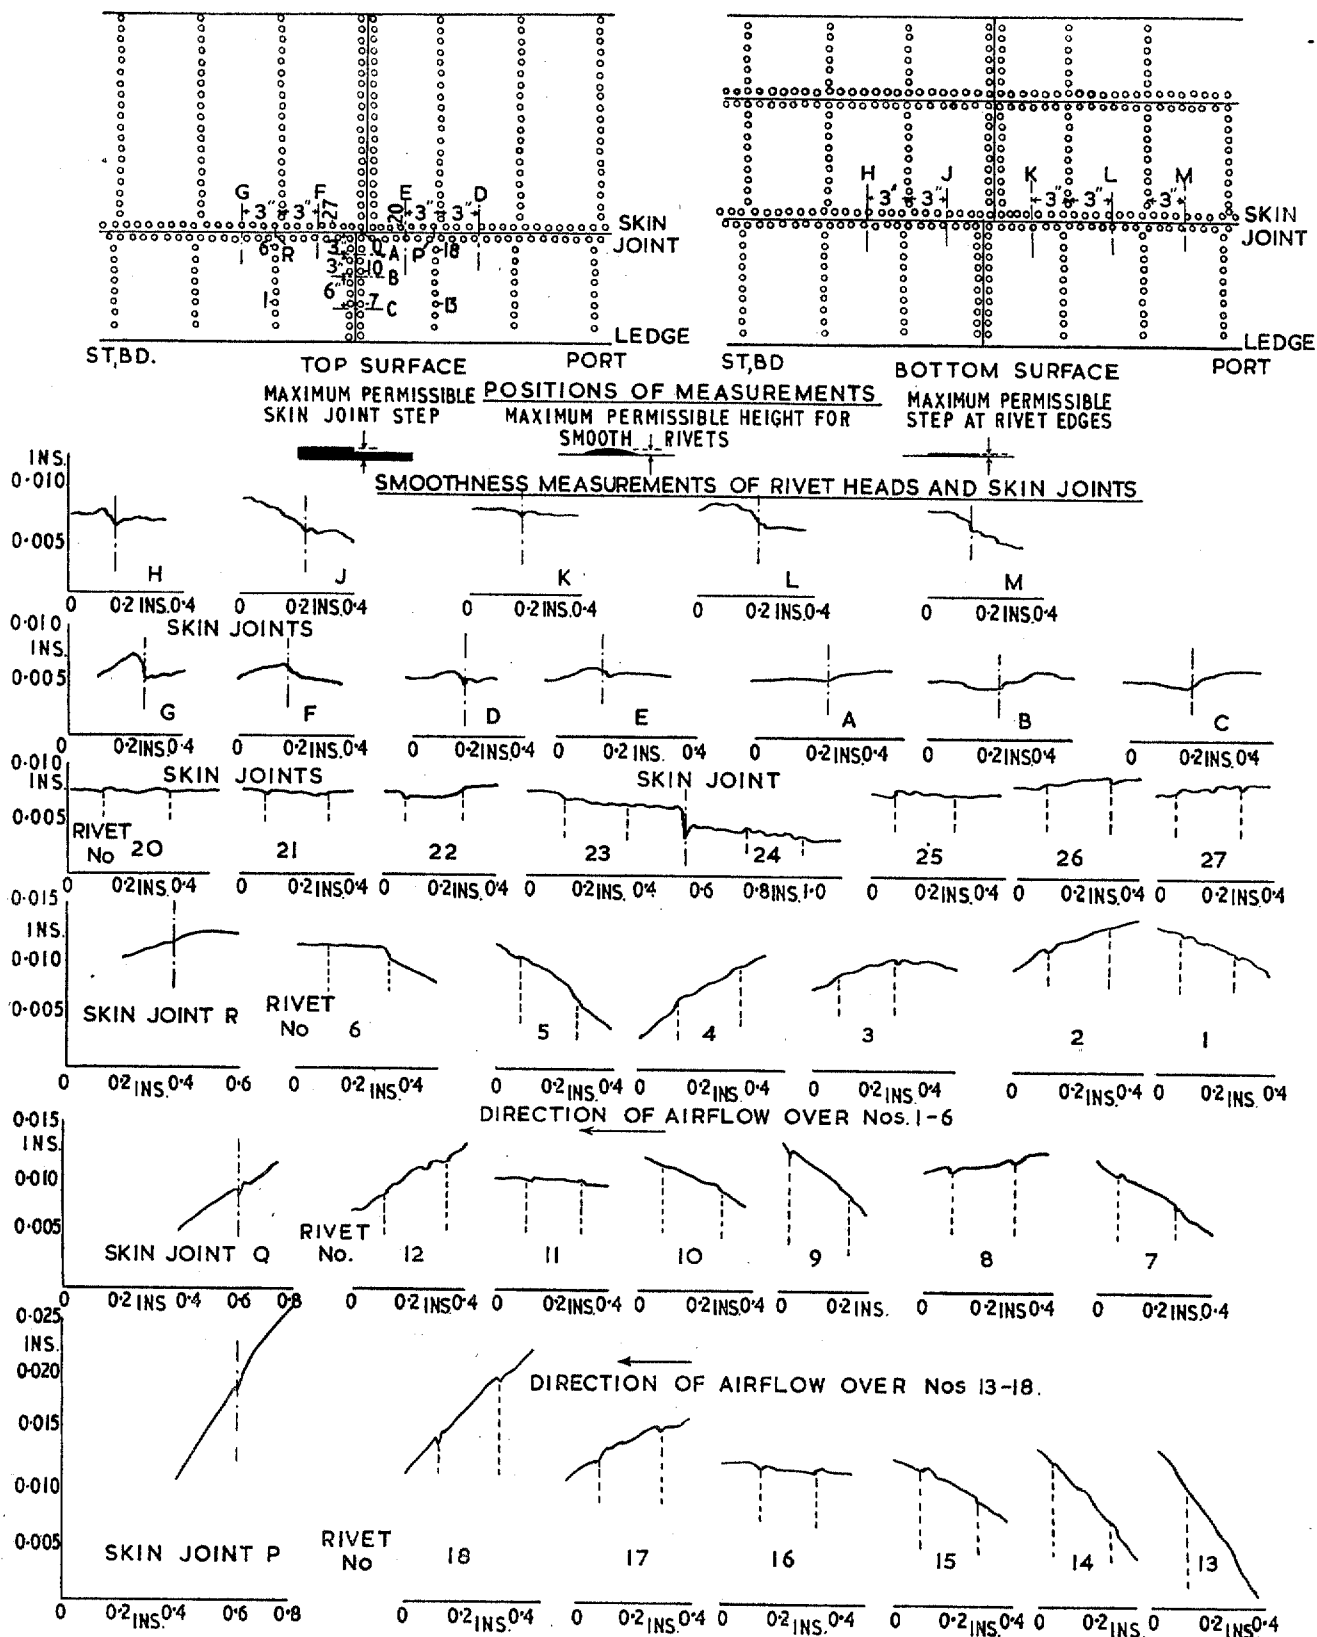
Smoothness Measurements of Rivet Heads and Skin Joints.
